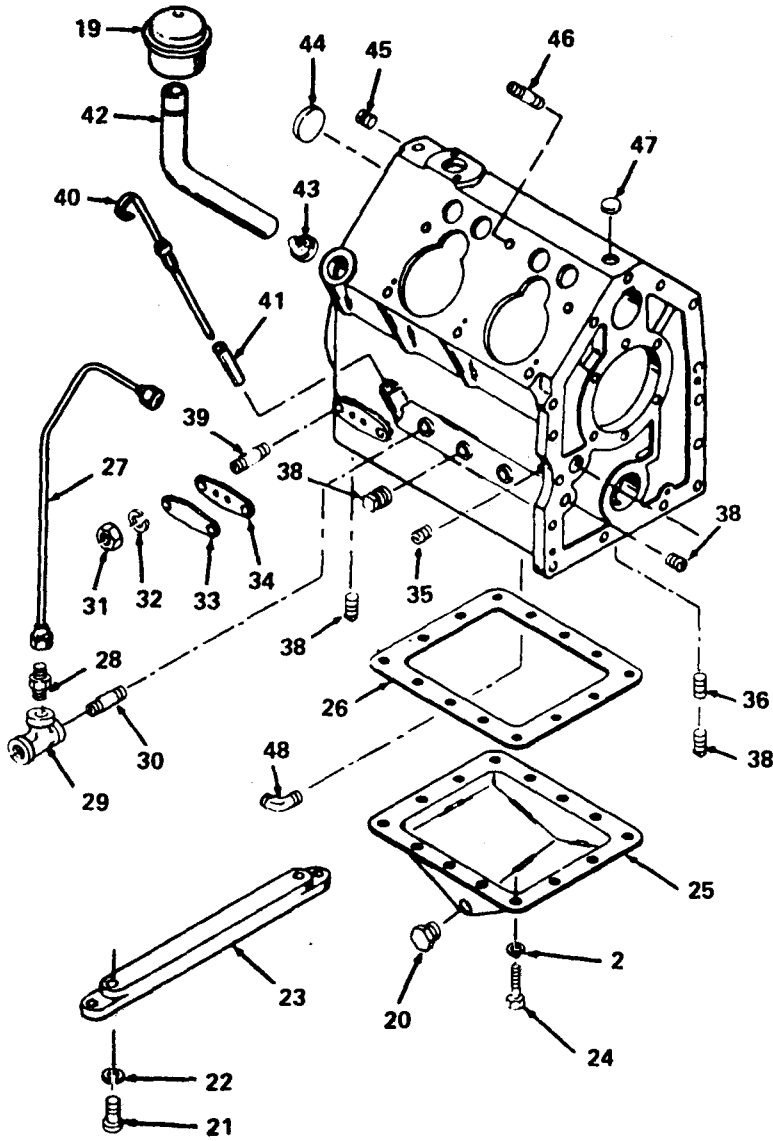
Engine Block and Related Parts (Sheet 2 of 2).
